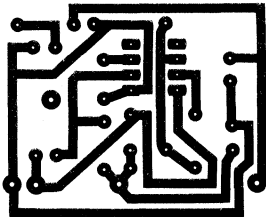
Transformer Coupled Supply 1X PC Board Layout (Component Side View)
